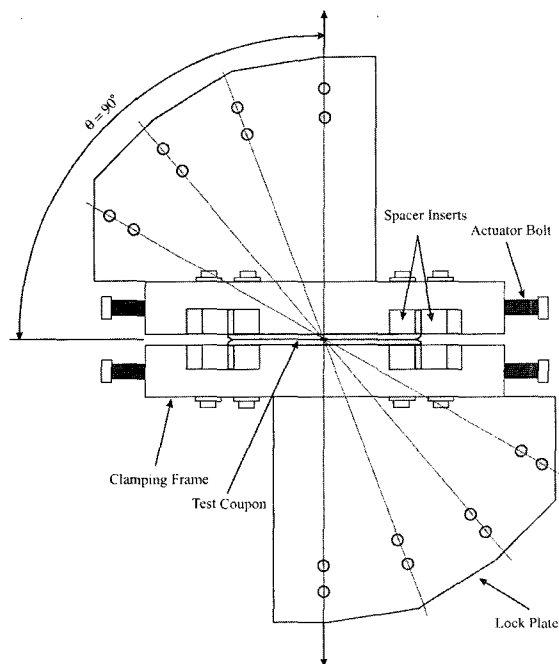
The test fixture to apply the combined tension and shear loads on the spot welded specimens.
